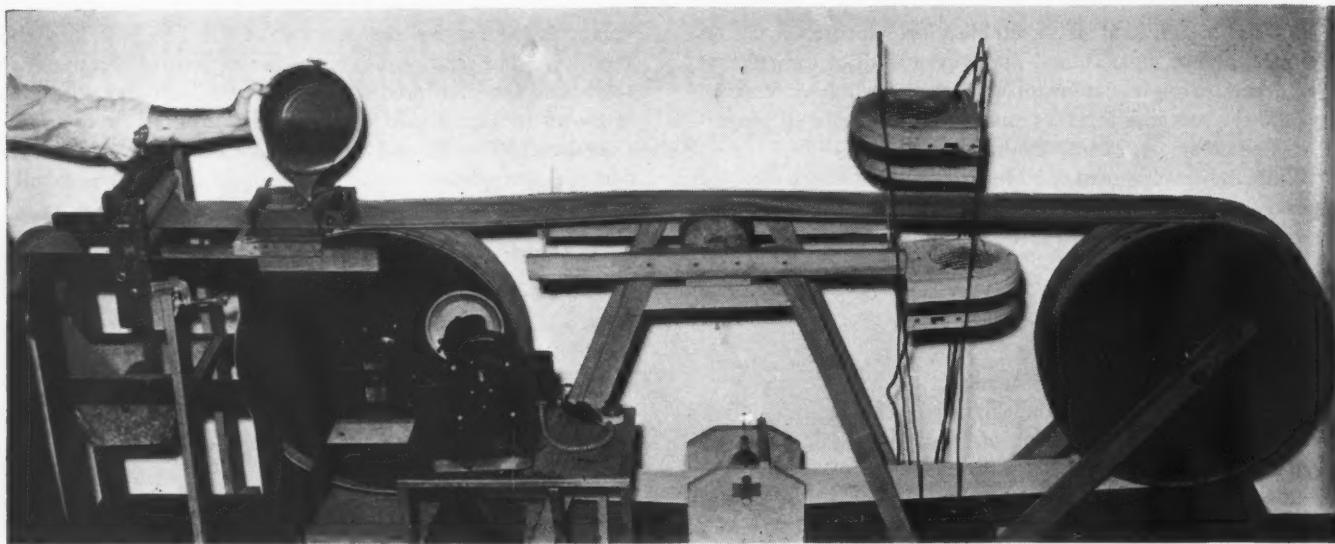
illustrates a small pilot-plant machine which was built to demonstrate the manufacturing principles just described. Since the material can be made in sheet form on
